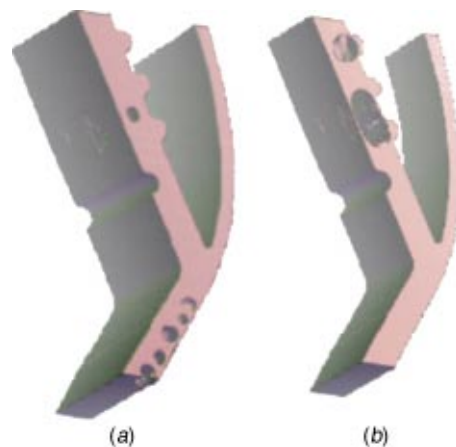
(a) A complete nickel alloy spring with surface defects. (b) A deeper section of the same part, showing that the bottom defects are primarily on the surface, but the one small hole near the top leads to a large void within the spring.
